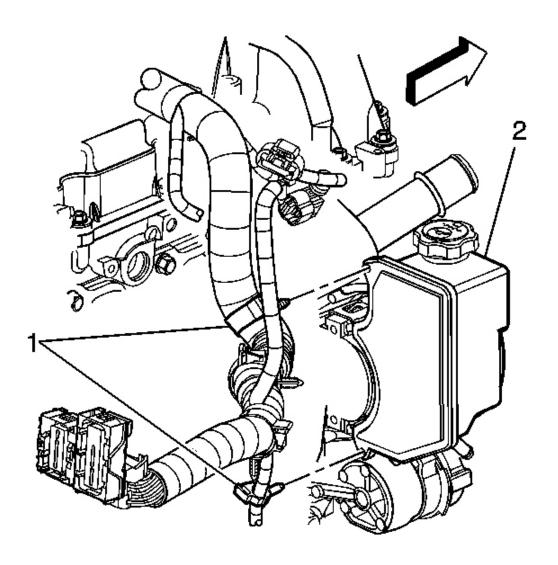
View Of Power Steering Pump & Engine Wiring Harness Retainers Courtesy of GENERAL MOTORS CORP.
